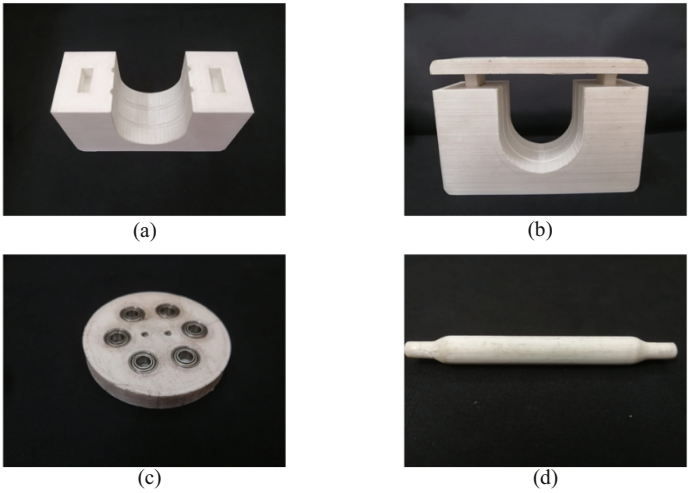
3D printed components of the pump (a) Base; (b) Base with the lid; (c) Rotor; (d) Roller.
